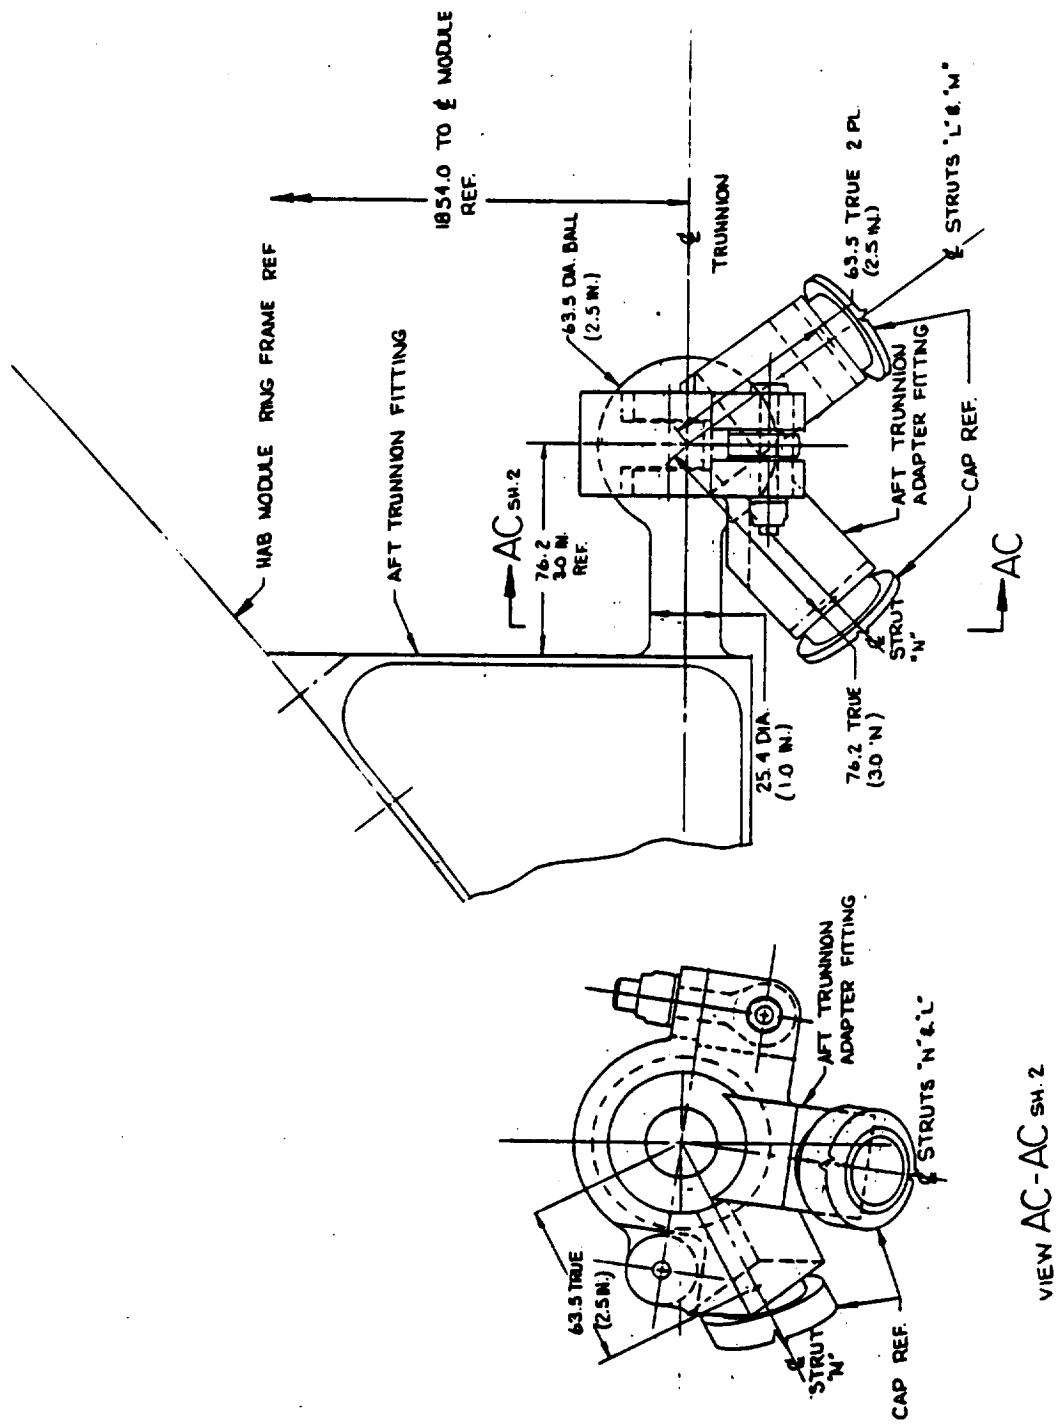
Maintenance and Assembly EVA Minimized by Clam-Shell Module Attachment Fitting
